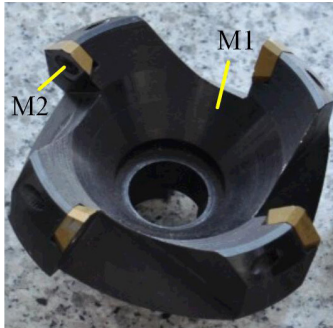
Four-tooth high speed face milling cutter with a diameter of 63 mm
